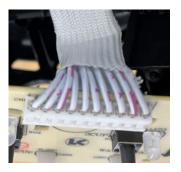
A flat ribbon cable. Parallel, evenly spaced wires. We can use this wire for the final product.
